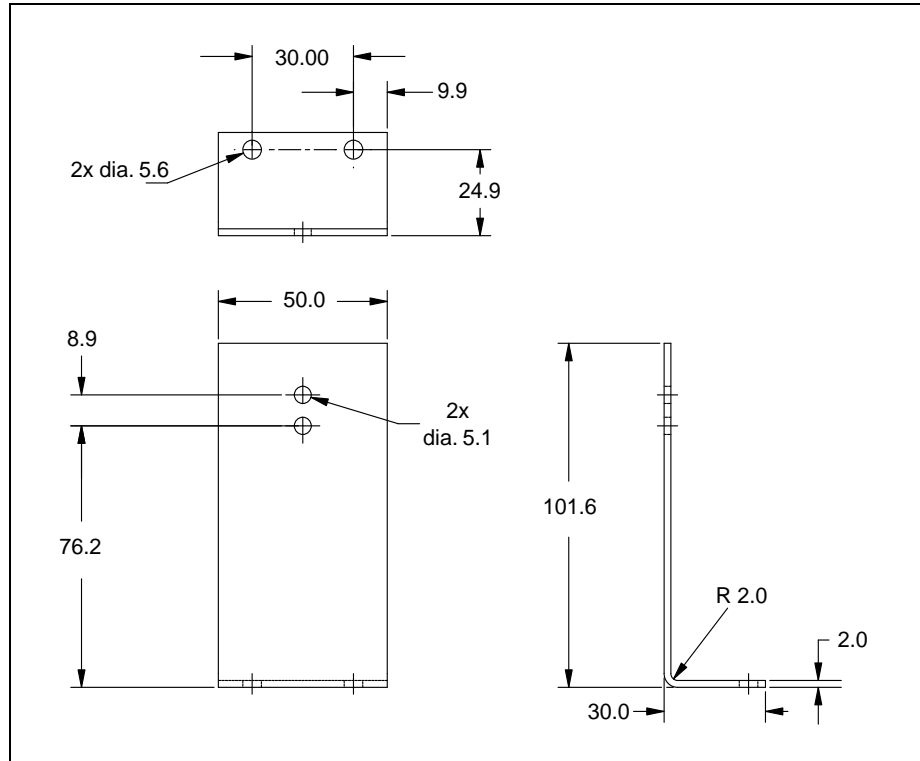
Dimensions for Fabricating User-Supplied Stay (Units in mm)
